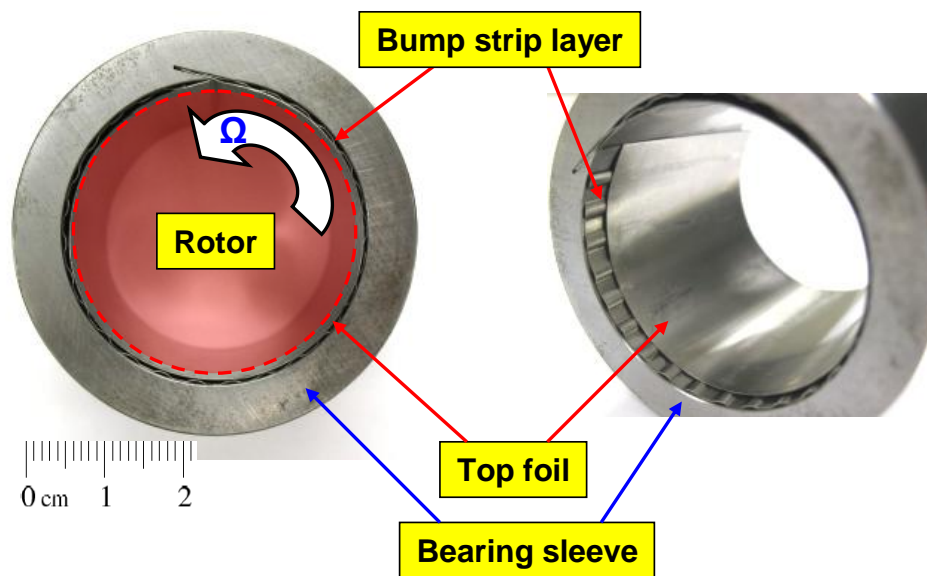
Photographs of bump-type 1st generation gas foil bearing for oil-free turbomachinery. Manufacturer: Korea Institute of Science and Technology (KIST).
